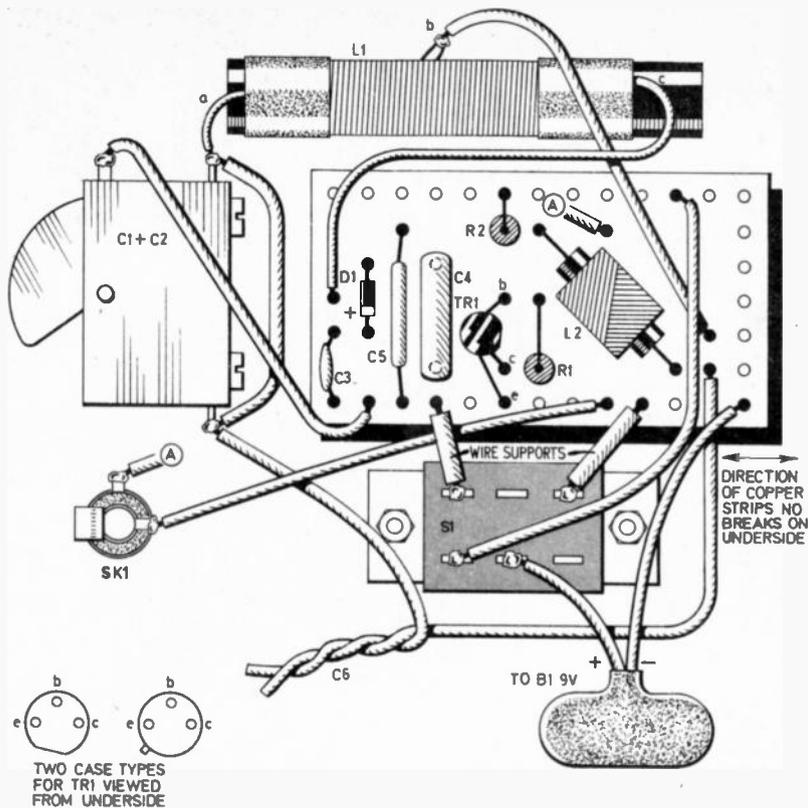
Layout of the components on the wiring board and inter-connection details.
